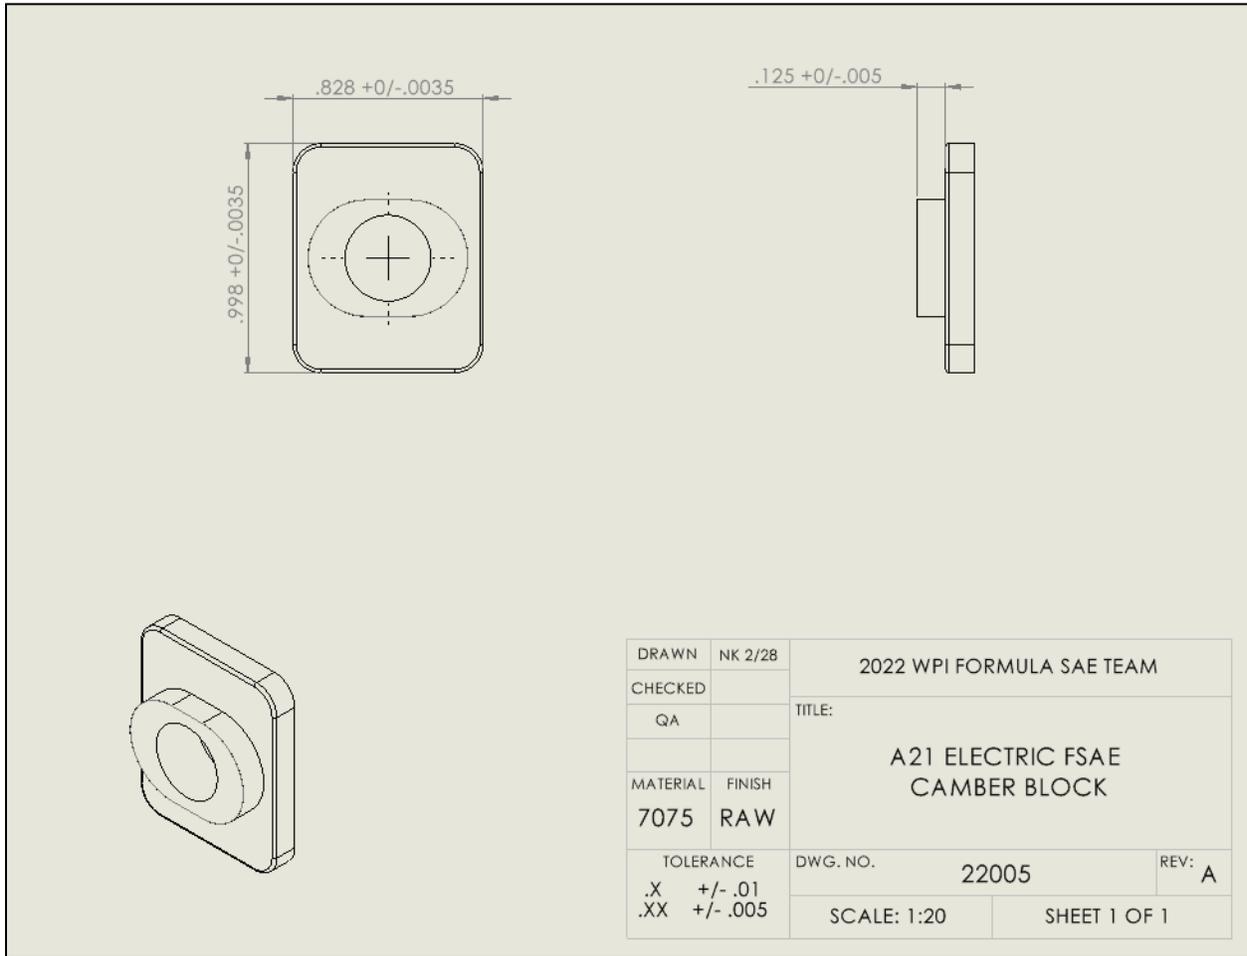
Technical drawing of camber block showing important tolerances
